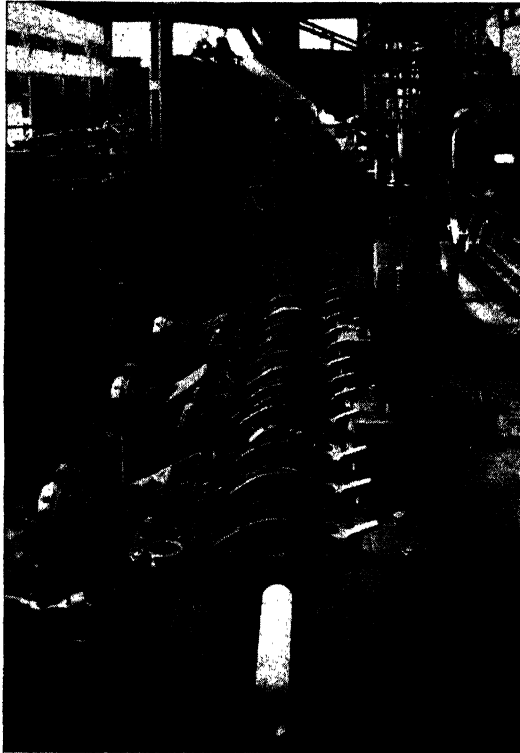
Push Bench for Seamless Tubes. The view shows the tube emerging from the series of reducing dies.
